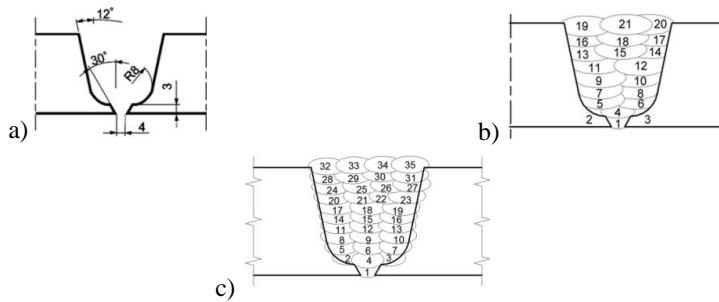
Diagrams: a) Preparation of joint edges for welding, b) Sequence of passes laying during welding with heat treatment, c) Sequence of passes laying during welding with temper beads technique
